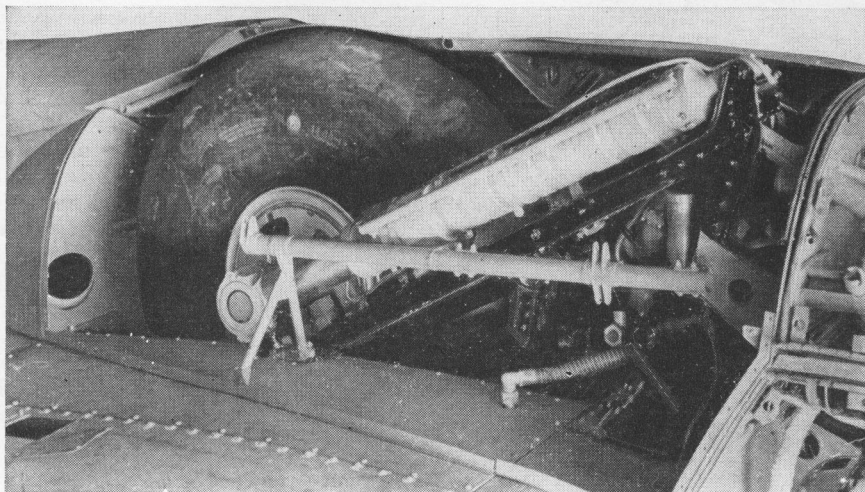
Retracted landing gear. The large cylinder, one each side of the wheel, is oleo strut shock absorber. A heavy triangular frame attaches the gear to the front spar and the wing rib. One fairing panel has been removed to show the mechanism.
